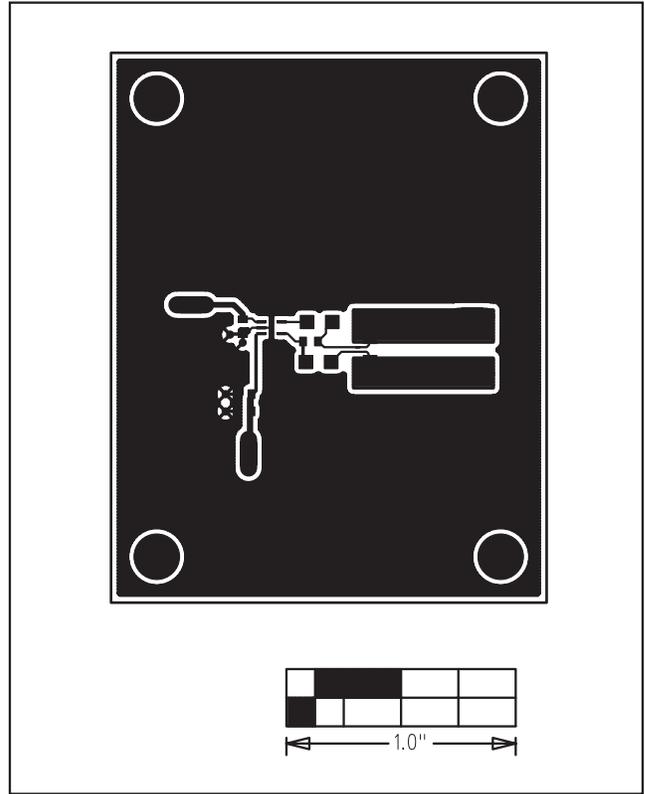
MAX9937 EV Kit Component PCB Layout—Component Side
